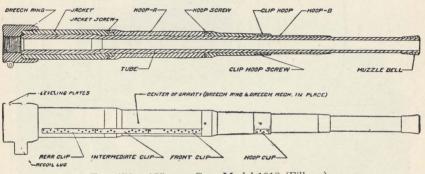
155-mm. Gun, Model 1918 (Filloux).
